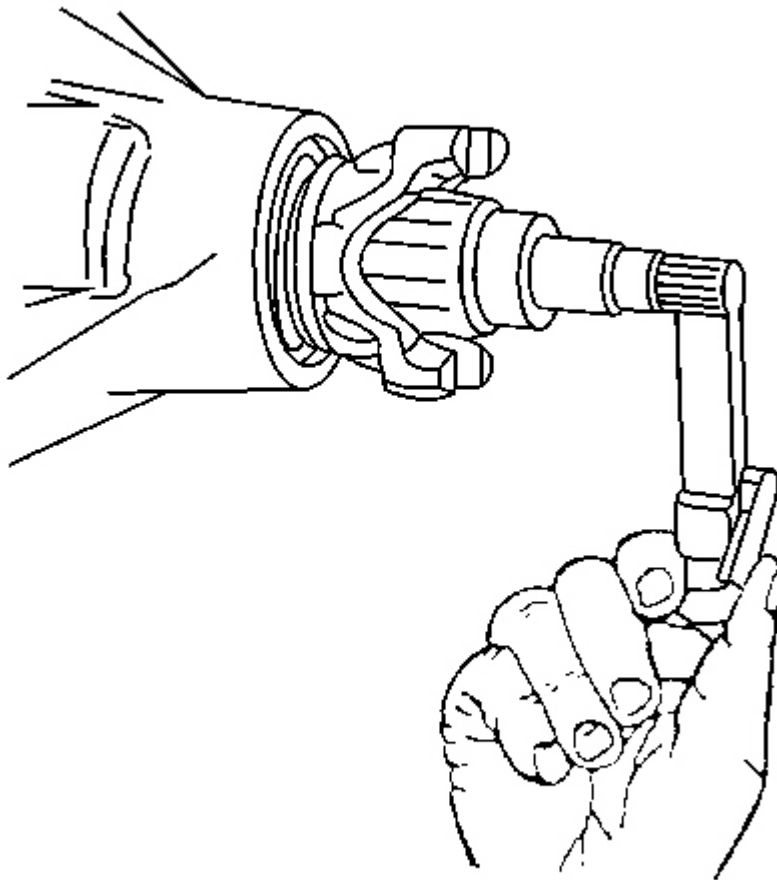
Measuring Pinion Rotation Torque - Front Axle
